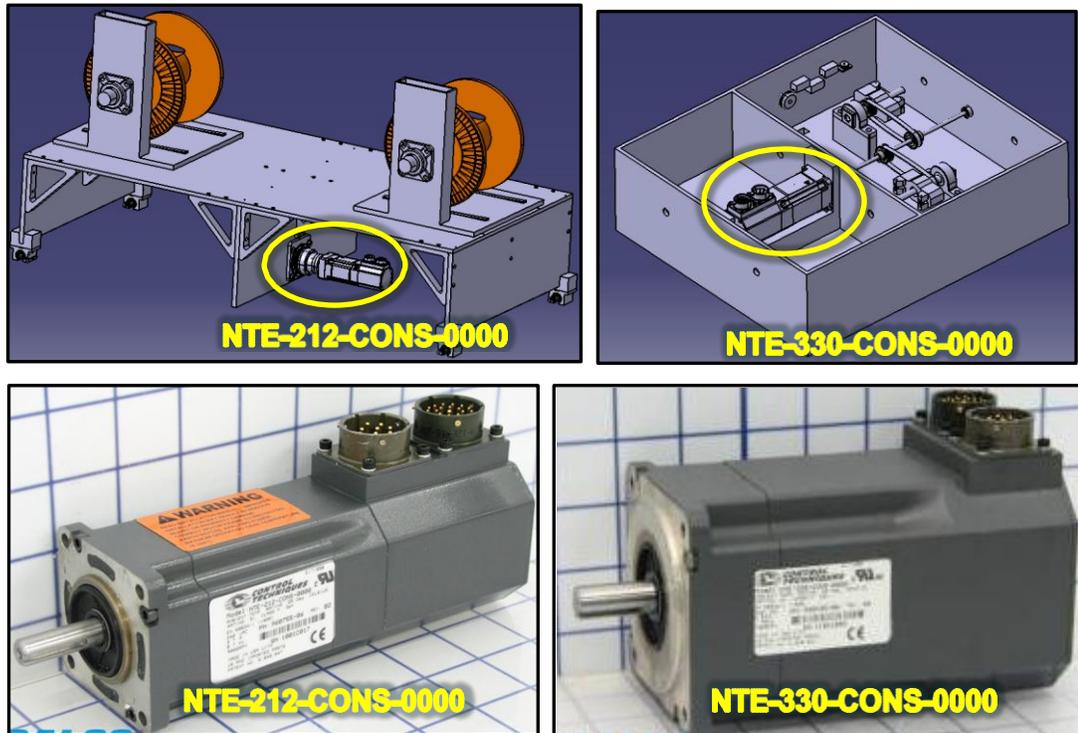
NTE-212-CONS-0000 [21] Shown on the Wind Carriage (Left Top) with the Actual Motor Shown on Bottom Left and NTE-330-CONS-0000 [20] Shown on the Winding Box (Top Right) and Actual Motor Shown on the Bottom Right
